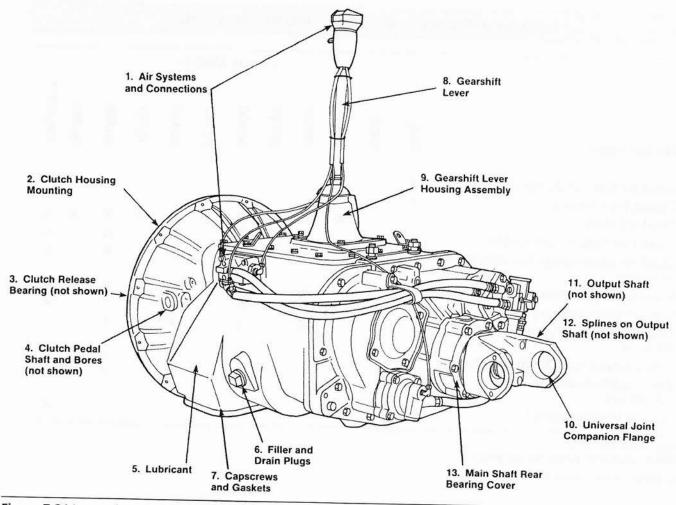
Inspection points on a standard transmission. (Courtesy of Roadranger Marketing. One great drive train, two great companies—Eaton and Dana Corporations.)
